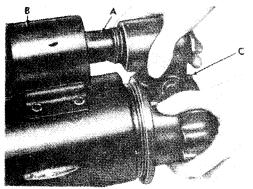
REMOVING COMMUTATOR END PLATE, BRUSHES, AND ARMATURE.
